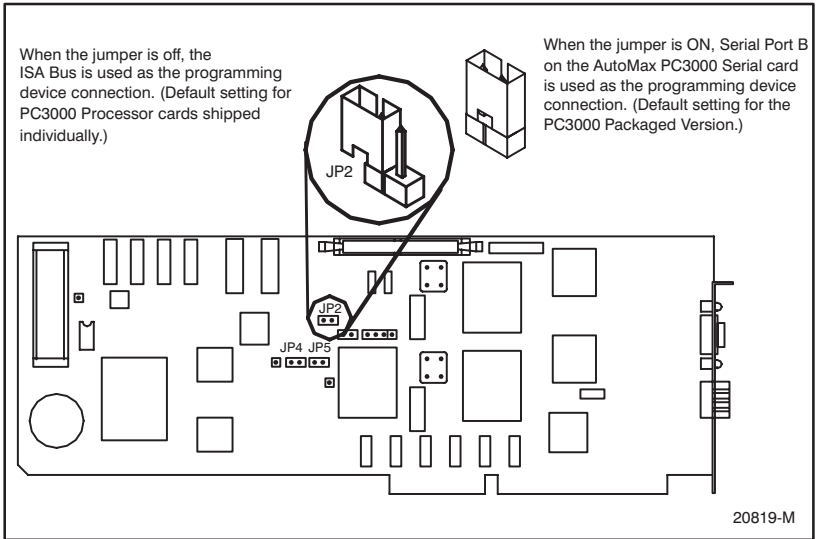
Removing Jumper JP2 on the AutoMax PC3000 Processor Board
